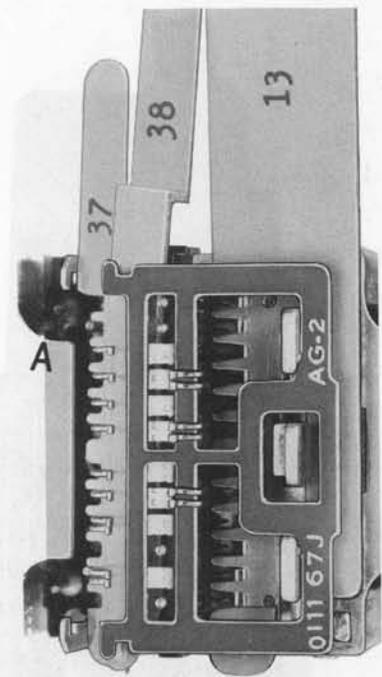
Detail 13 Comb in Place With Detail 37 Comb and Detail 38 Comb Lifter
